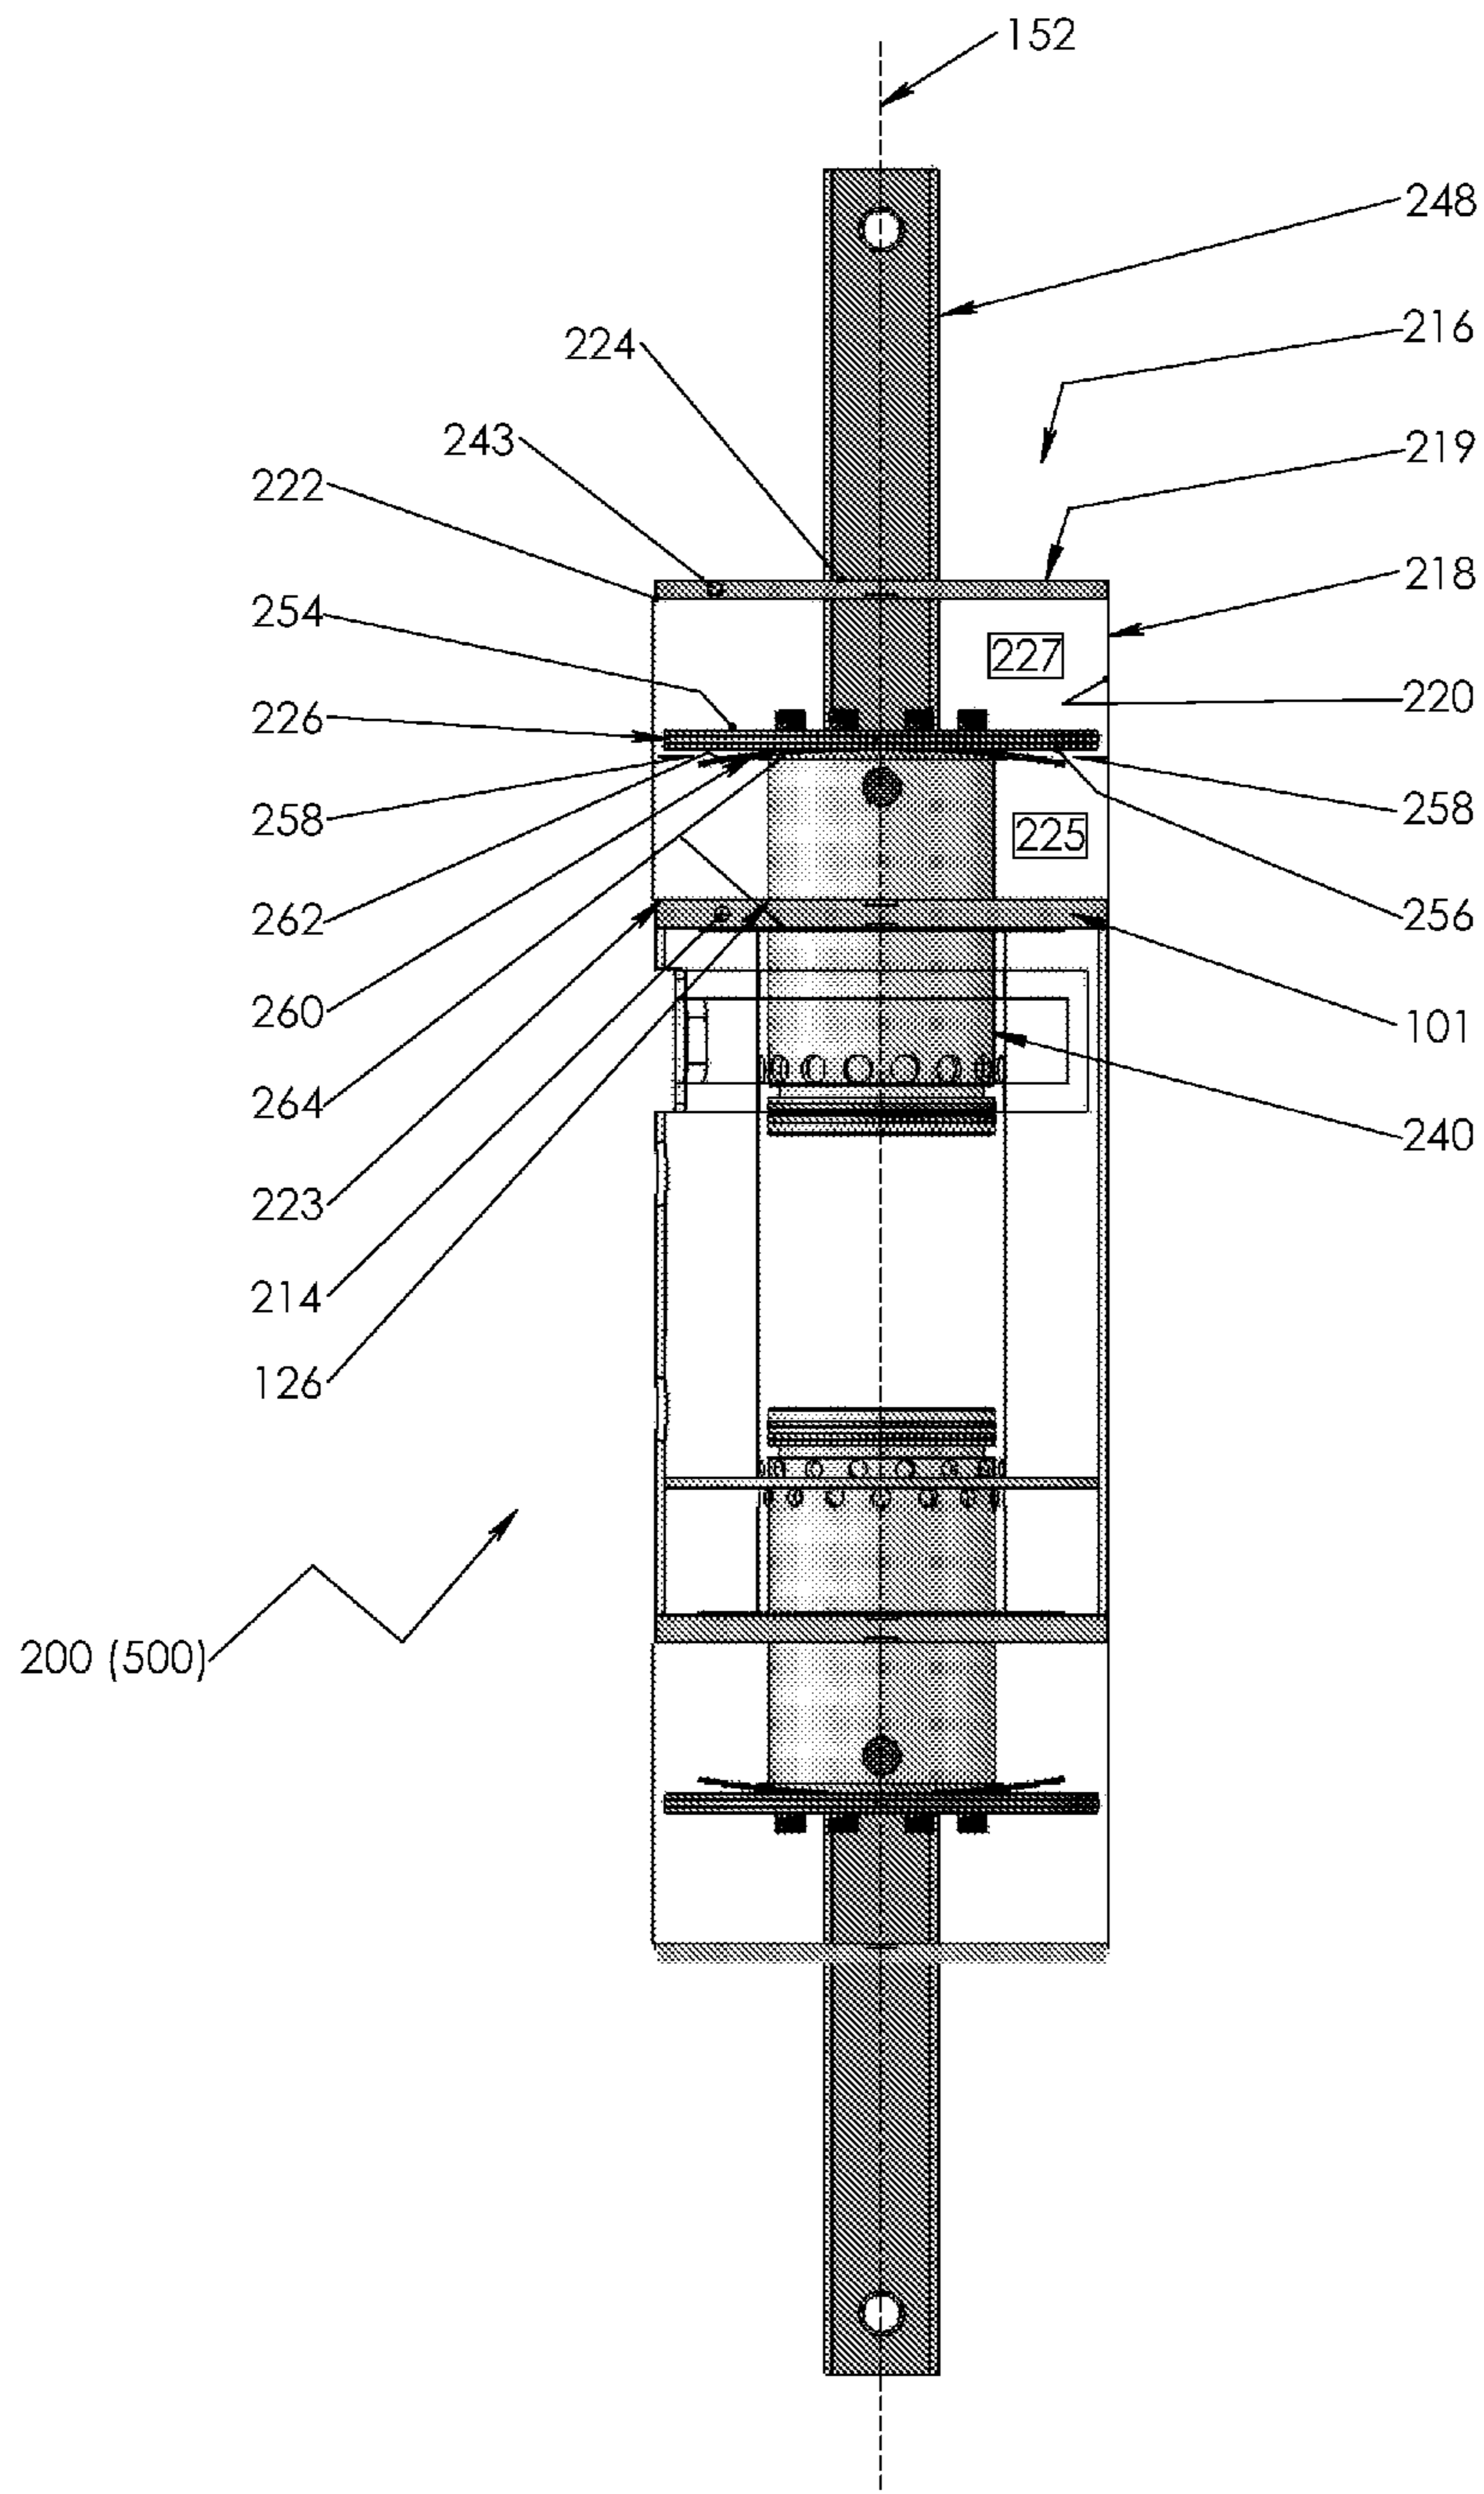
B. SIDE, CROSS-SECTIONAL VIEW OF COMBUSTION ASSEMBLY DETAILING SECOND AIR PUMP SECTION
